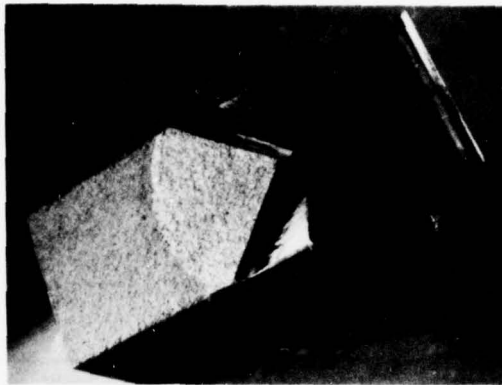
Fracture Surface of 7075-T73 Toughness Specimen 0124.
